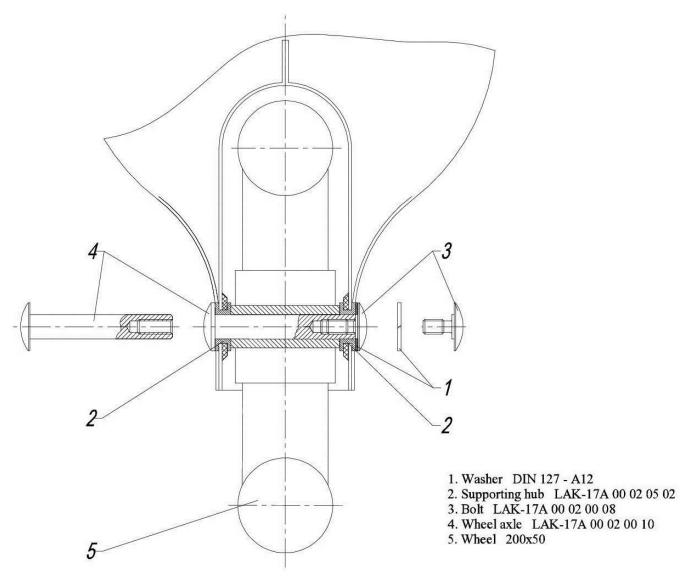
01. Rigging and de-rigging of tail wheel
